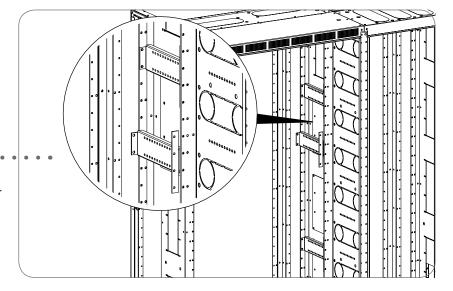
Fix holder for support insulator holder into Frame plate.
